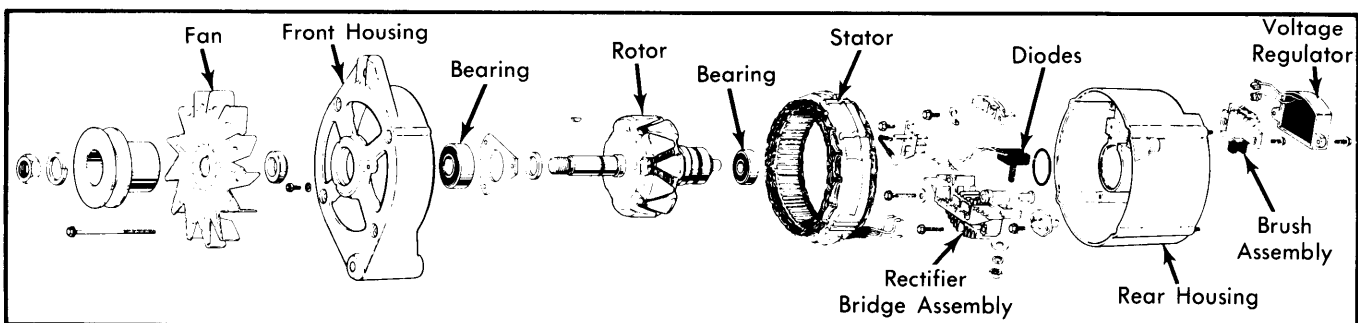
Disassembled View of SEV Motorola Alternator (Volkswagen Shown)
